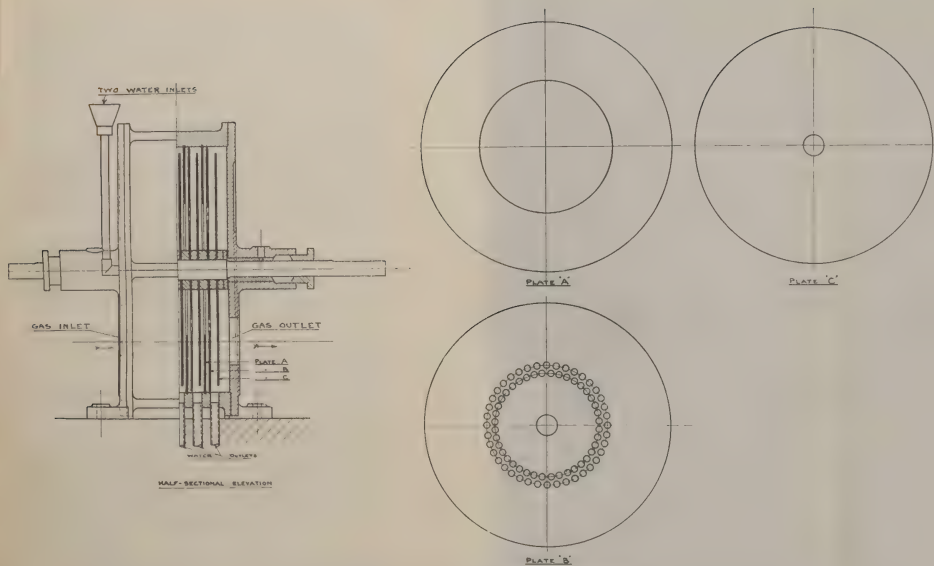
Section through gas washer. Department of Mechanical Engineering, McGill University.
